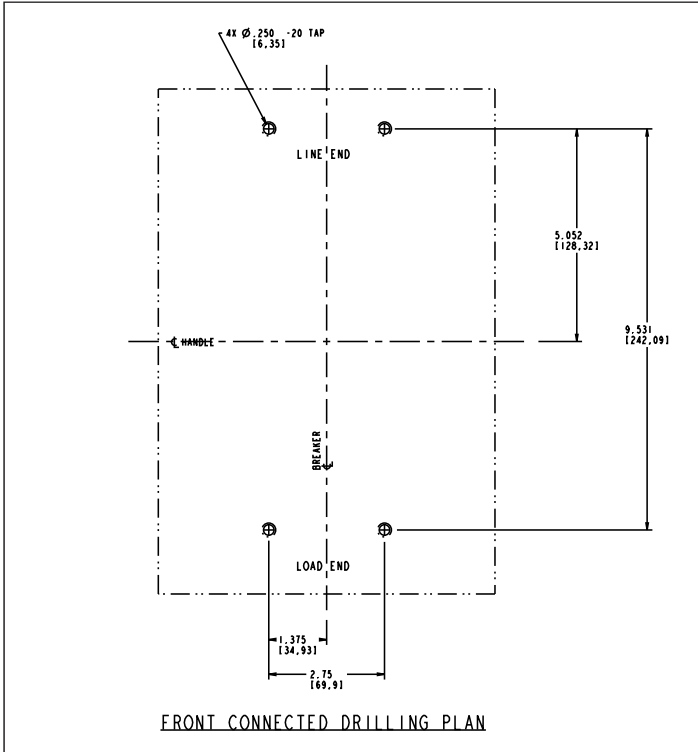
Circuit Breaker Mounting Bolt Drilling Plans.
